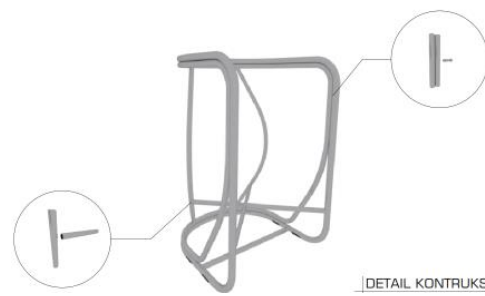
The construction of the therapist chair, and the joints using M4x40 nuts and welds.
